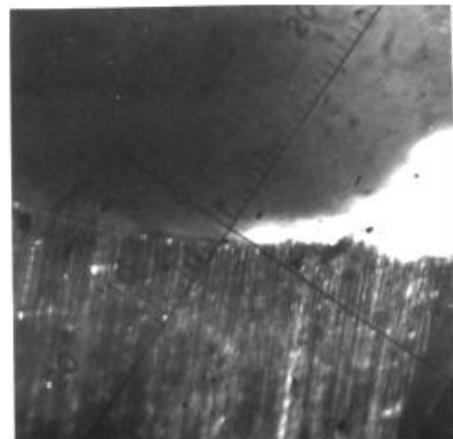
Deposits on cutting edge after turning with $v = 180\text{m/min}$
